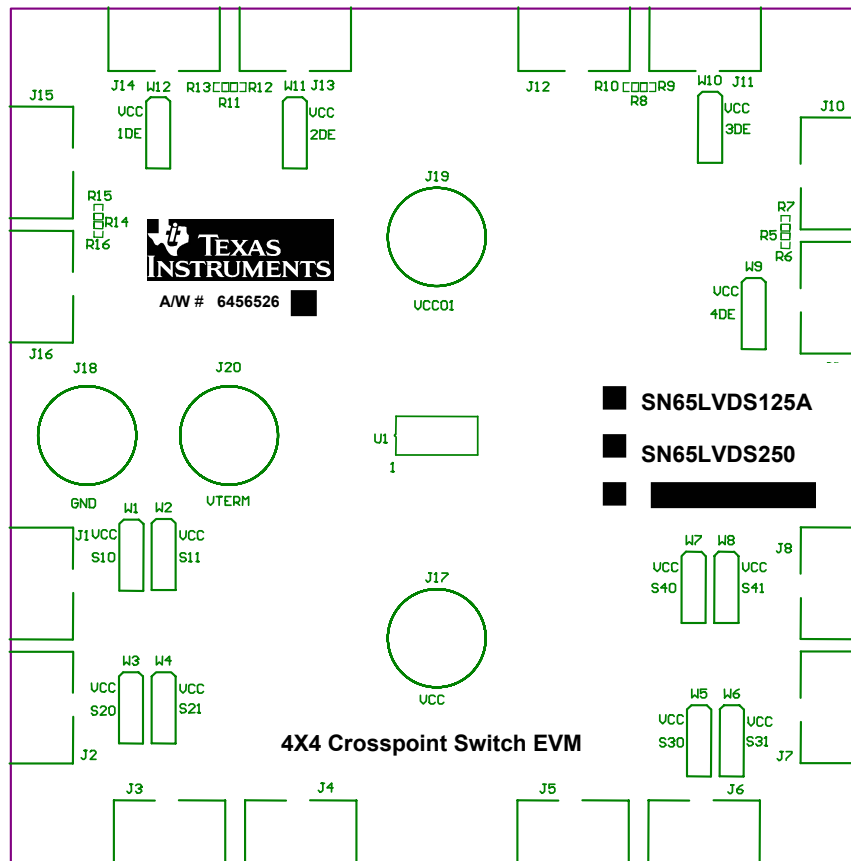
4x4 Crosspoint Switch EVM Board Layout
